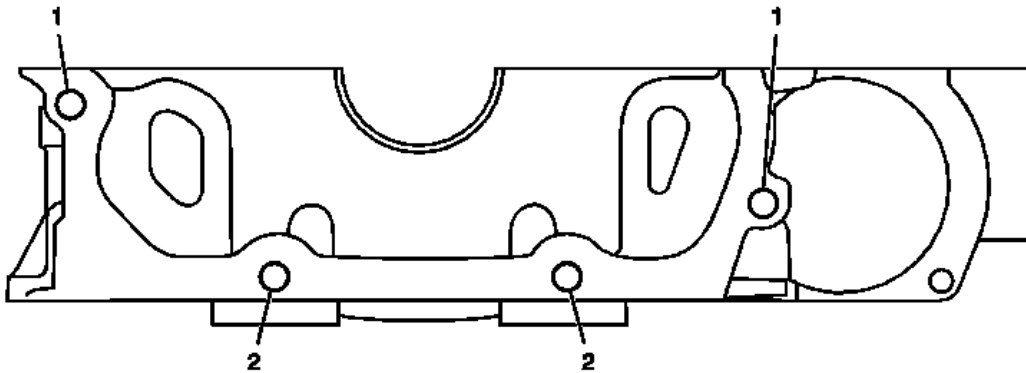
Identifying Bolt Size & Locations On Engine Block - Top
